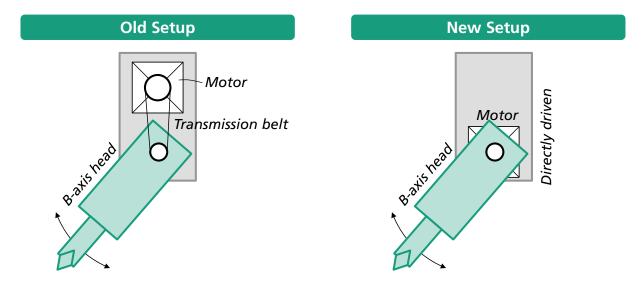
Original (old) setup and new setup of the B-axis head (Monforts machine tool)
